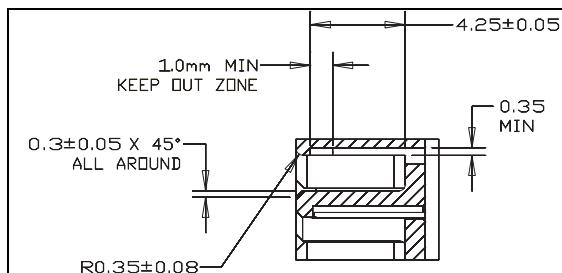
Slimline device plug connector interface dimensions (section C-C)
